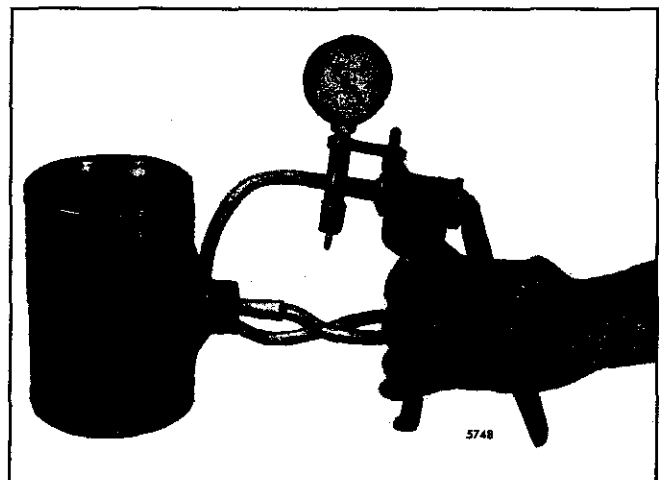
Checking Piston Pin Retainer for Proper Sealing Using Tool J 23987-01
